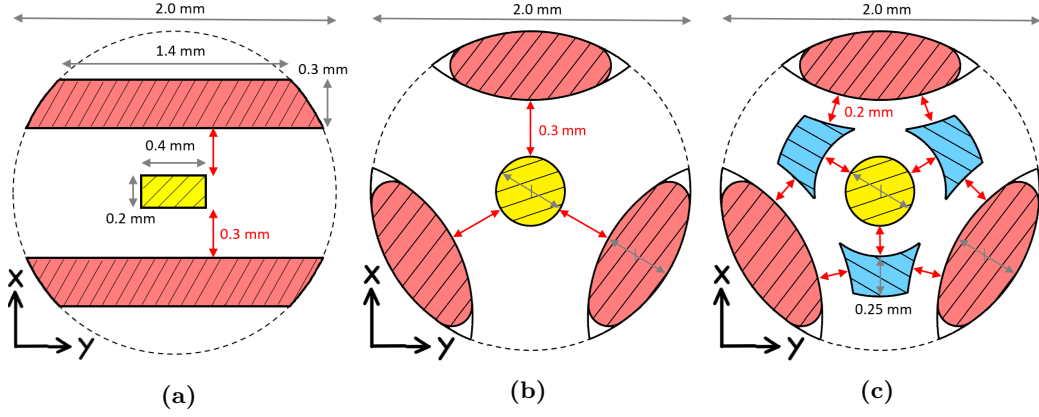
Cross-sections of bending mechanisms. Bending flexures in pink, (flexible part of) grasping rod in yellow, (flexible parts of) bending rods in blue, minimum clearance in red. a) Category I and II. b) Category III. c) Category IV.
